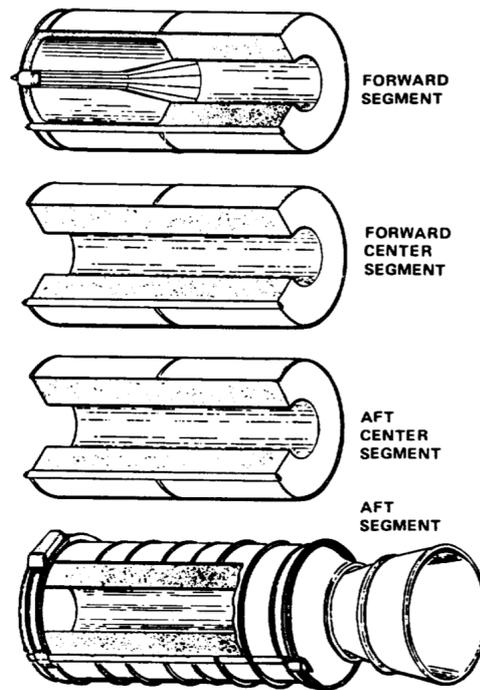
Cutaway of a Space Shuttle SRB segments, showing a solid rocket motor including the nozzle.^[4]
